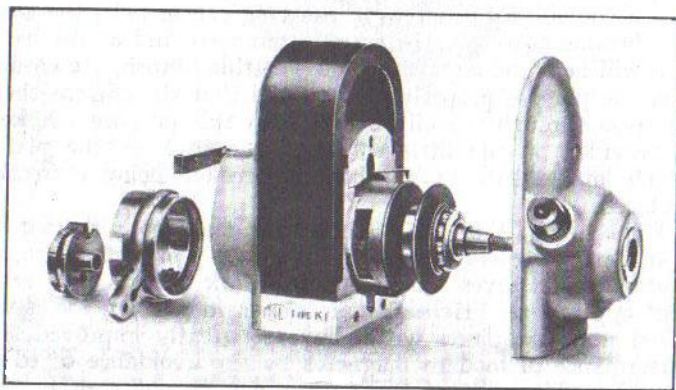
Component Parts of an M-L Single-Cylinder Magneto.
